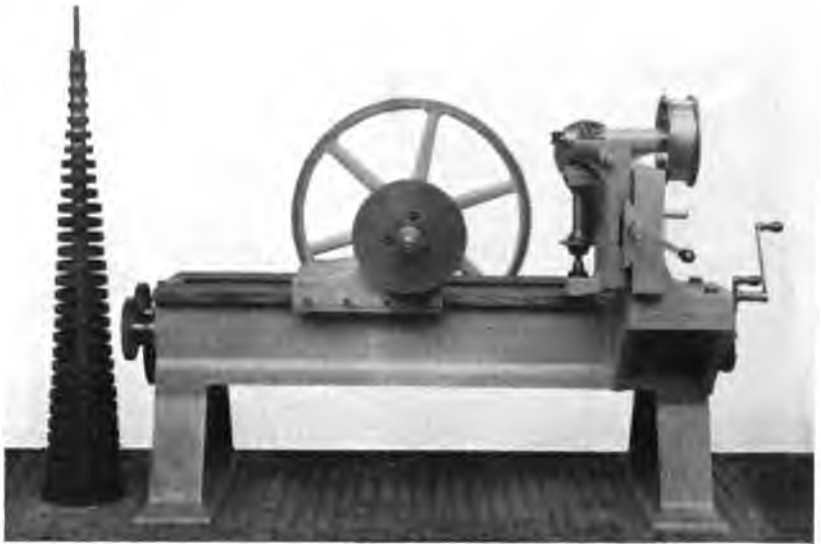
Machine for Cutting Wheels.* (Shepherd, Hill & Spink.) 1851.
